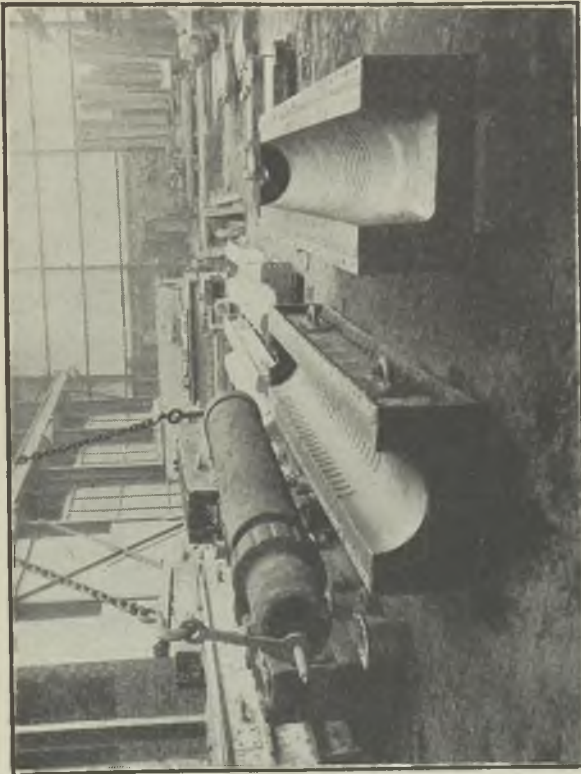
A.—MOULD AND CORE FOR A 24 IN. X 120 IN. VENTILATED ROLLER.
